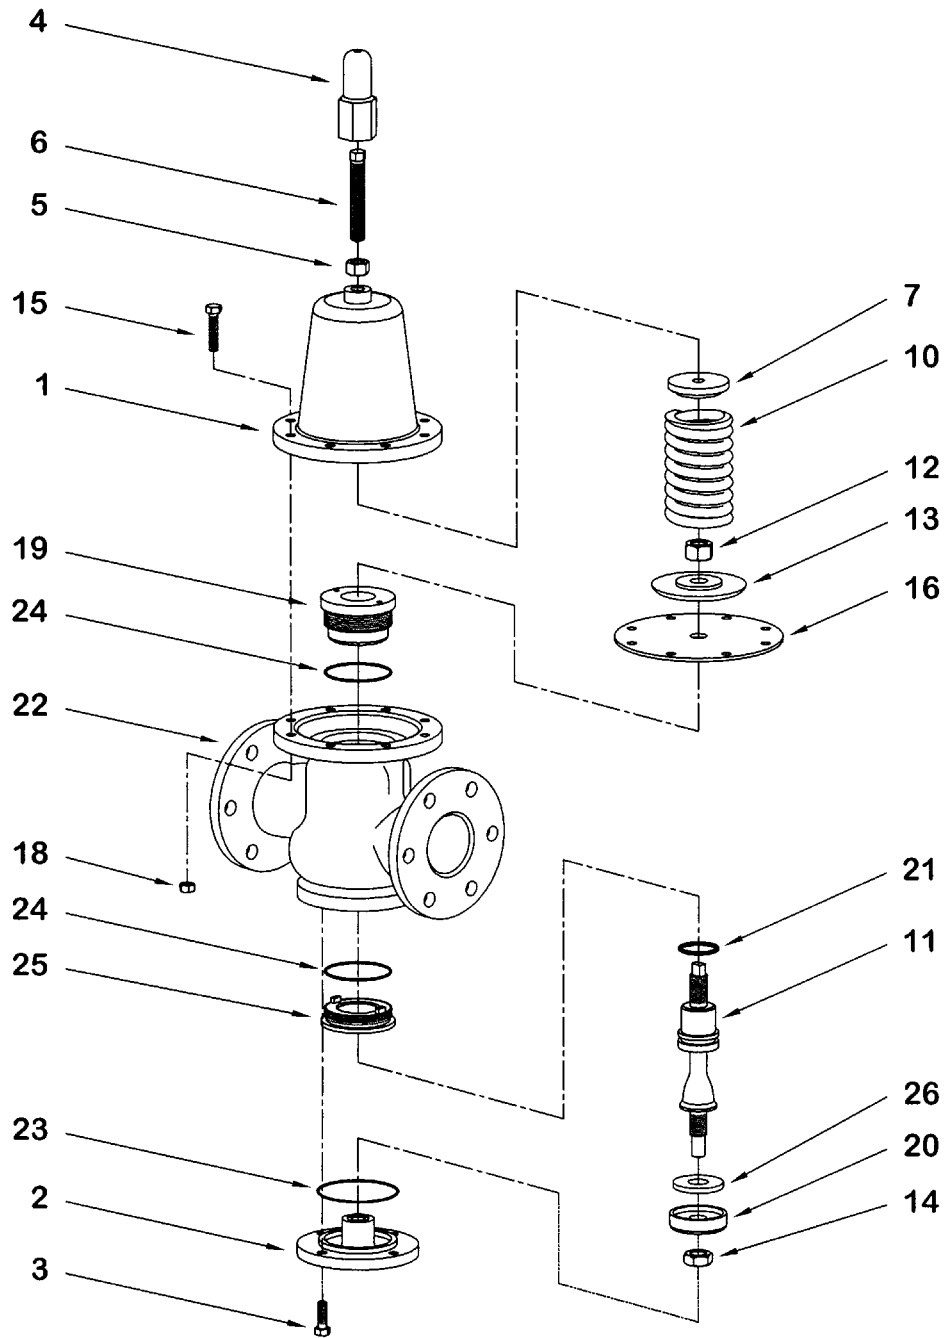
EXPLODED VIEW - TYPICAL 2" THROUGH 4" VALVE ASSEMBLY
